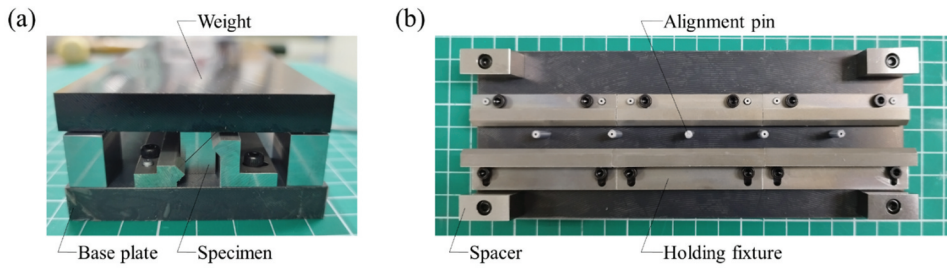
Photographs of a special jig for specimen fabrication: (a) side and (b) top views.
